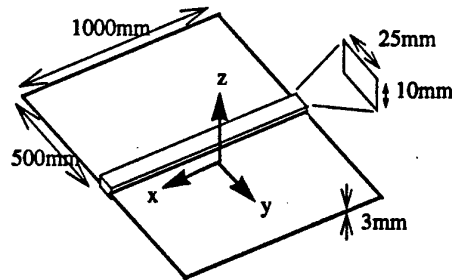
Two plates symmetrically welded to a solid beam
